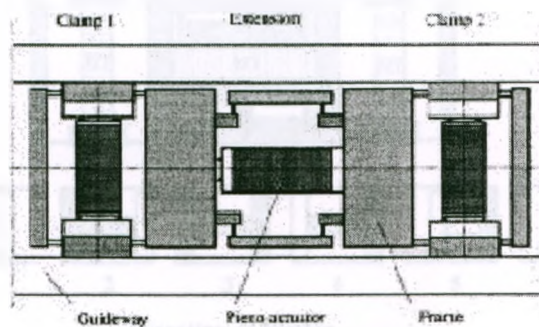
16. Zhang & Zhu piezoworm design [2].
